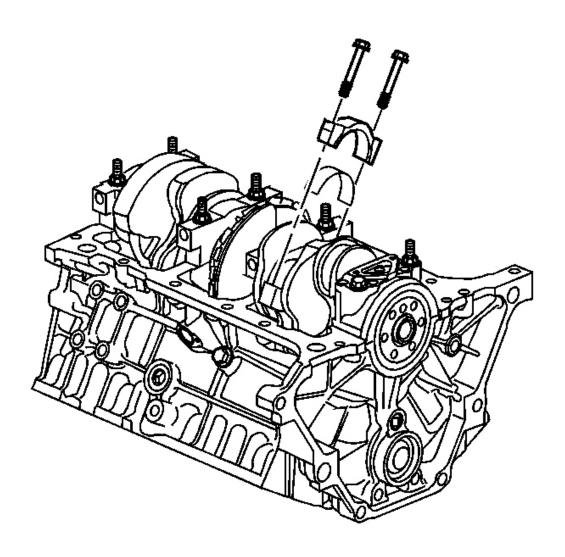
View Of Bearing, Bearing Cap & Bolts Courtesy of GENERAL MOTORS CORP.
